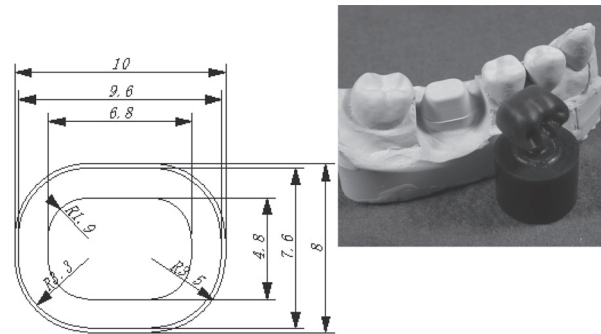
Die for fitting test and wax pattern fabricated by CAD/CAM.
